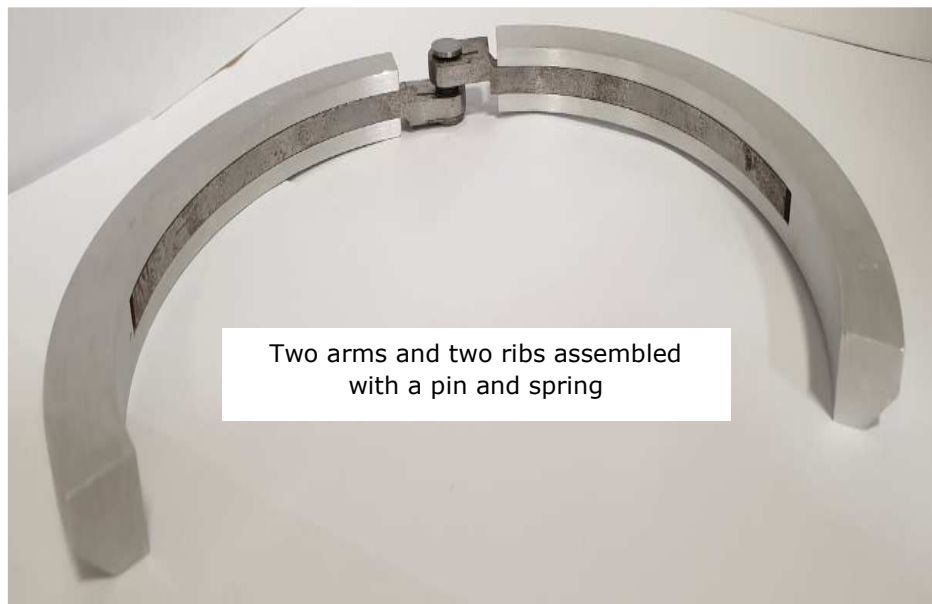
Completed CNC machined models of Phase 2 snap latch Prototype II: Manufacturing using CNC machining of aluminium & mild steel: two arms with two ribs, a pin and spring assembled (based on modified Snap-Latch Rings design B (3D CAD model in Appendix D).
